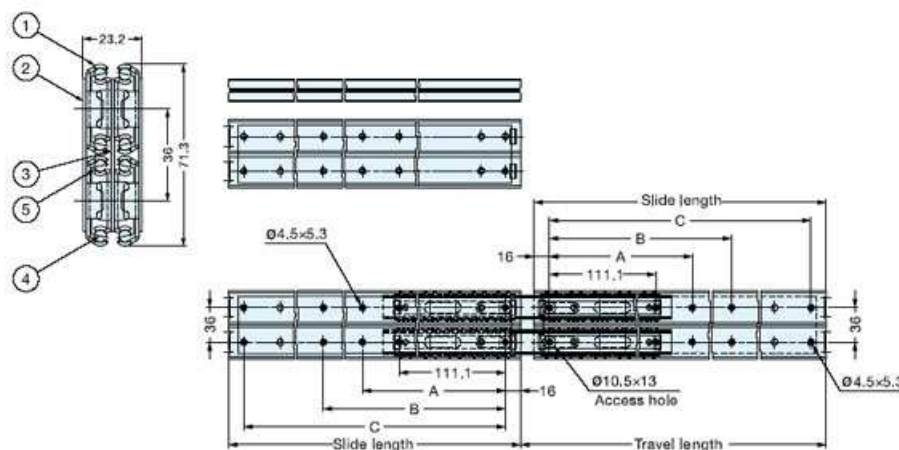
Dimensions shown in millimeters.<sup>14</sup>
